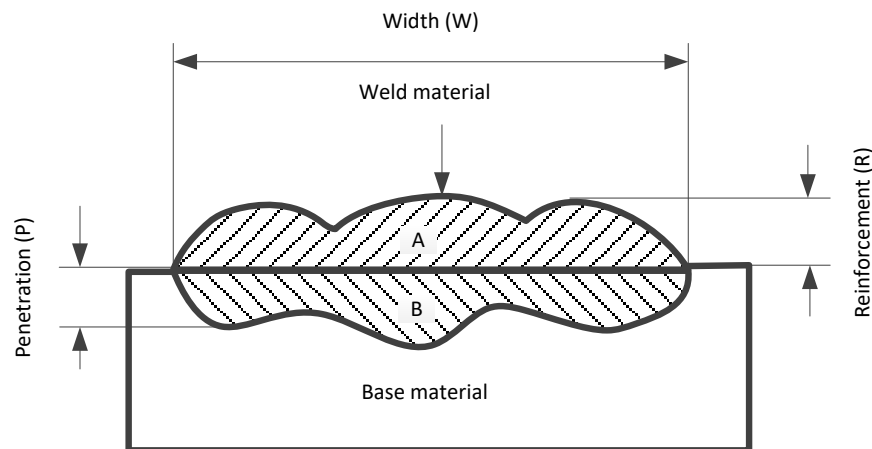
Characteristic geometric elements of arc welding deposition [7]
